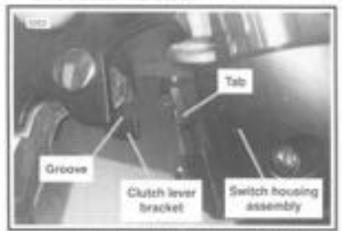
Fit Clutch Lever Bracket to Left Handlebar Switch Housings.
